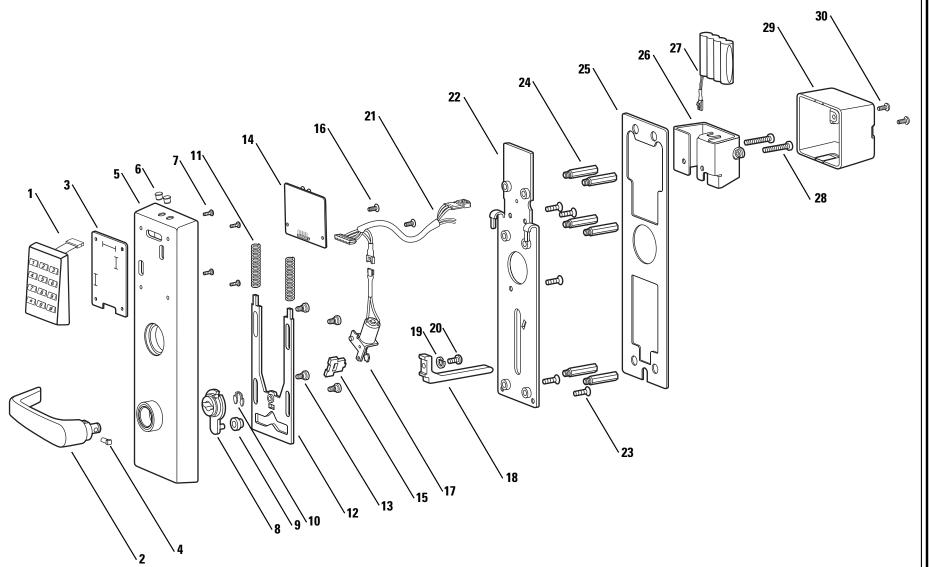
Keypad EZ reader and trim exploded diagram (Precision Hardware—rim type shown)
